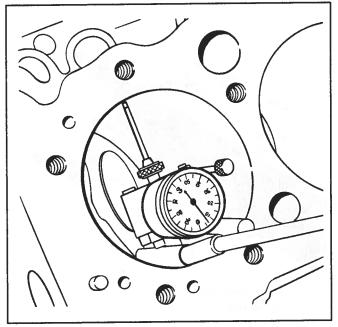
Using Dial Indicator To Check For Cylinder Taper And Out-Of-Round
